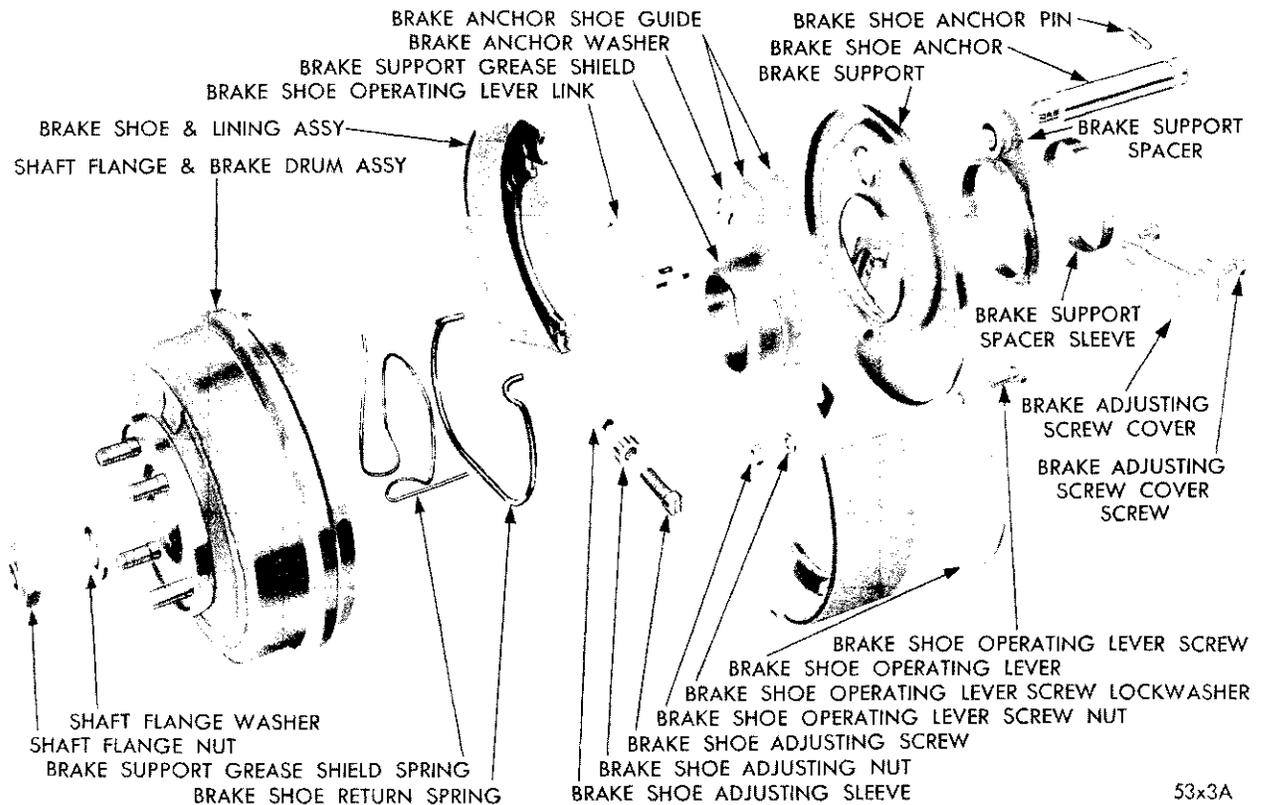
Parking Brake (Internal Expanding Type) (Exploded View)
